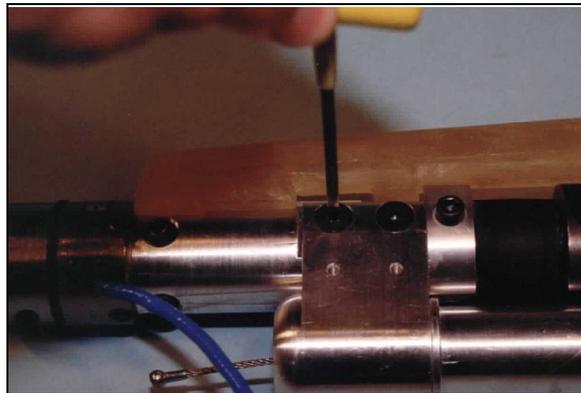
Attach the Spring Tube to the Lower Tibia Tube
